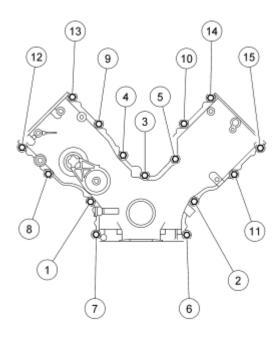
Installing Engine Front Cover With Engine Front Cover Gasket On Front Cover-To-Cylinder Block Dowel
